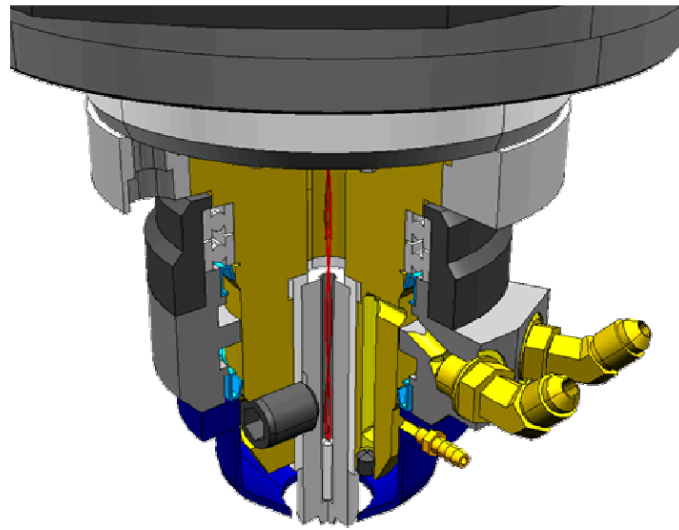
Schematic of the watercooled welding head [92]
